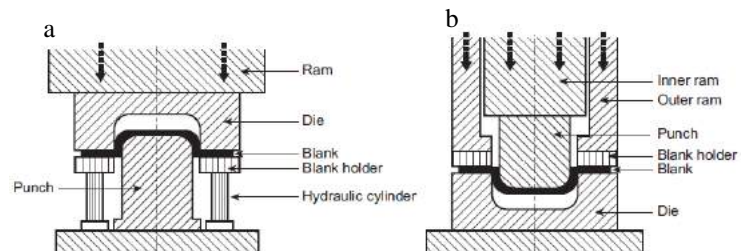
Single Action Draw (a) & Double Action Draw (b)
